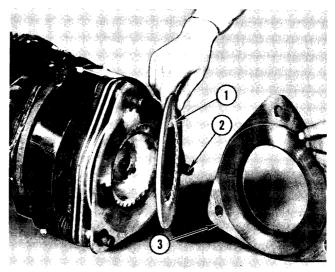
REMOVING BRAKE PLATE AND DISCS
